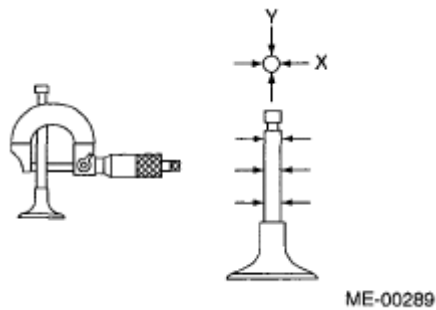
Measuring Outer Diameter Of Valve Stem With Micrometer
